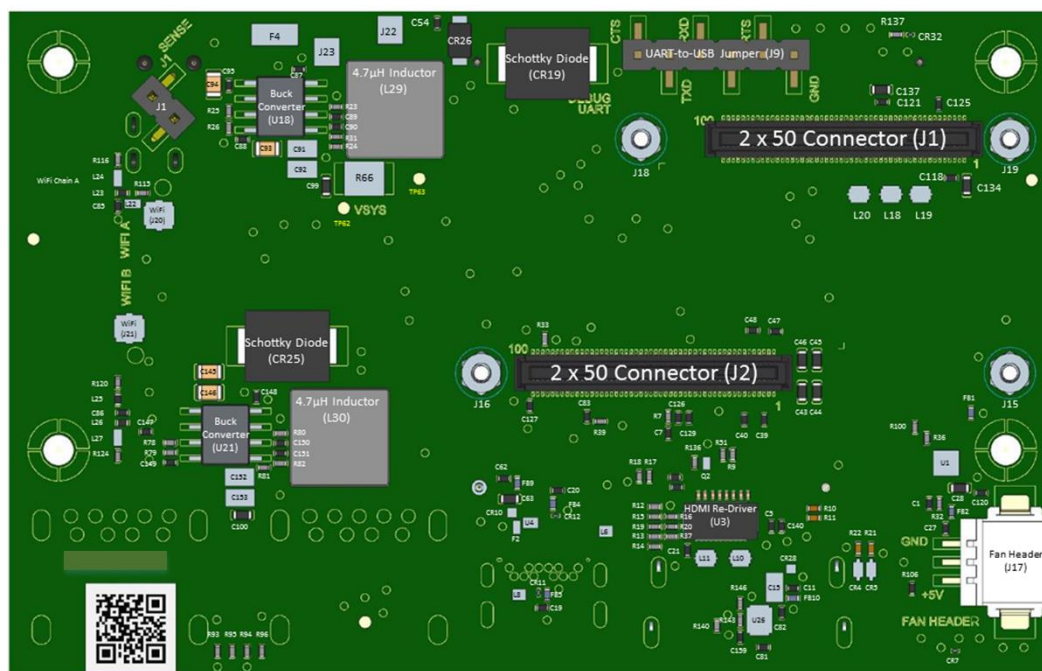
96B compatible carrier board layout.bottom view without module installed
